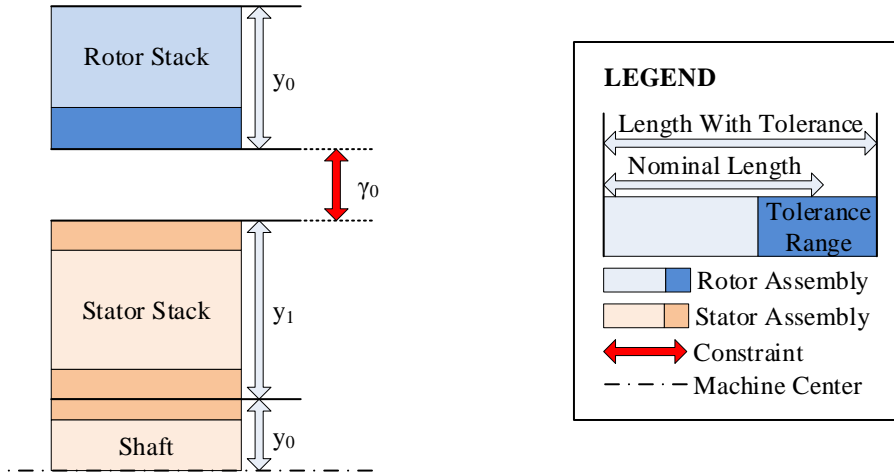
Radial tolerances (12/16 CSR prototype)
